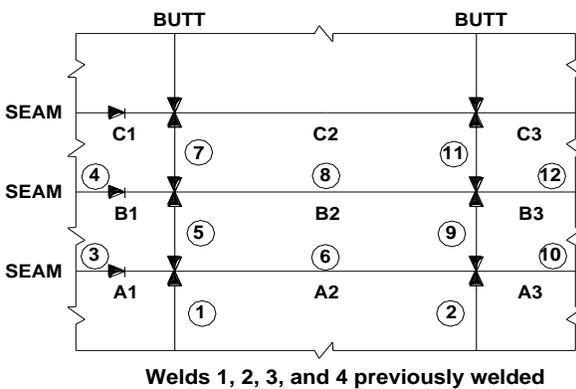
Typical Welding Sequence / Butts & Seams in Line
